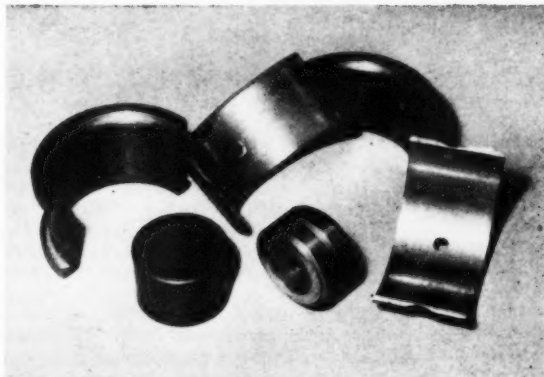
Bushings and bearing shells with bearing surfaces coated with pseudo-alloys
